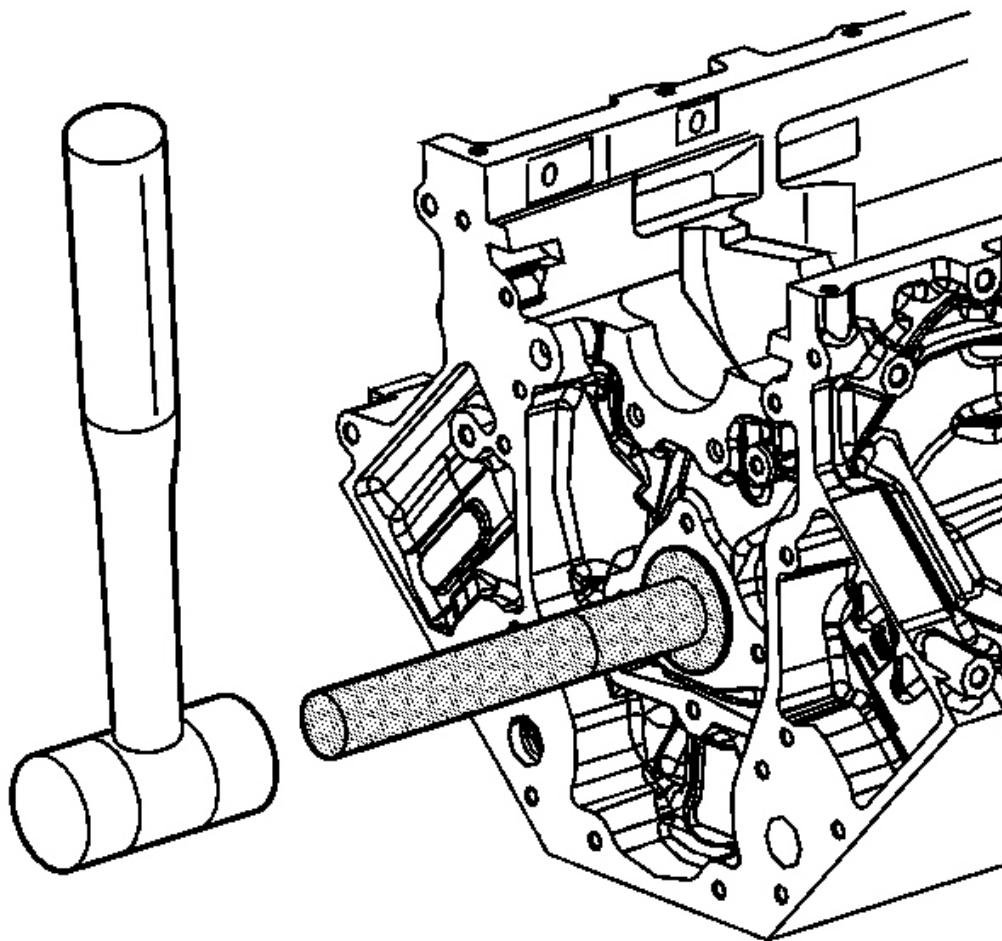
Driving Bearing Out Of Or Into Engine Block
